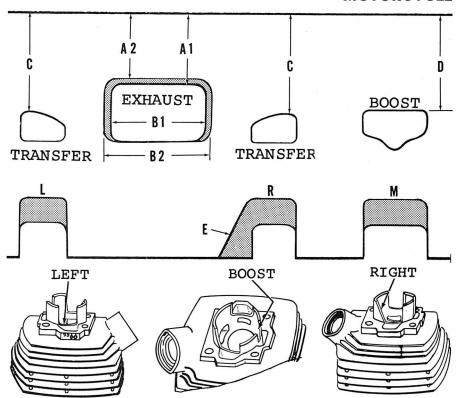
Basic port pattern of cylinder may be seen in these drawings. Cut-outs for transfer and boost passages should be enlarged and matched to openings in crankcase to eliminate restrictions
